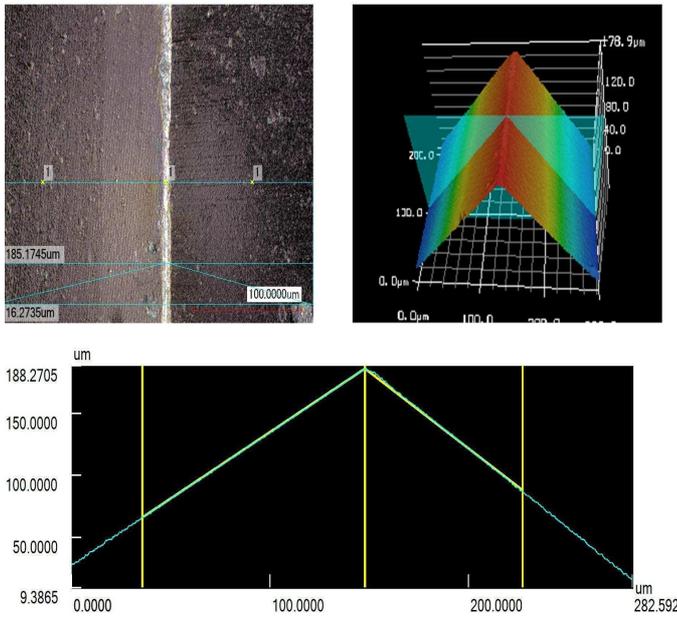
Angle measurement of the Cutting Tool End using the 3D Laser Scanning Microscope
